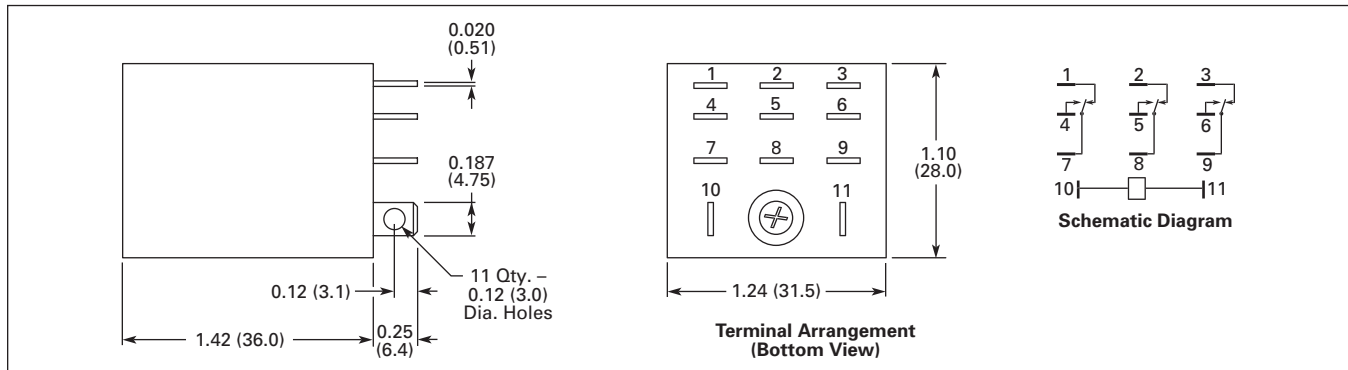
D7PR3 — Approximate Dimensions in Inches (mm)
